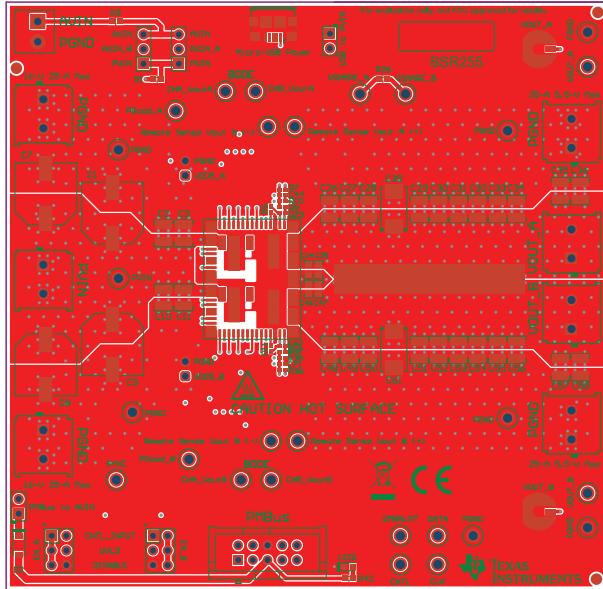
TPSM8D6B24EVM-2V0 Top Side Component View (Top View)
